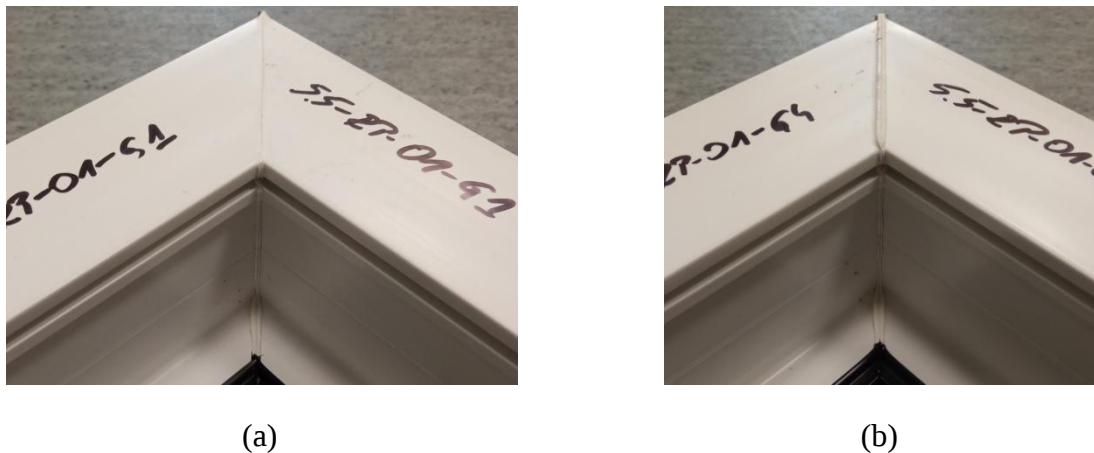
Representative welds from preliminary specimens: (a) first welding head, (b) fourth welding head [14]
